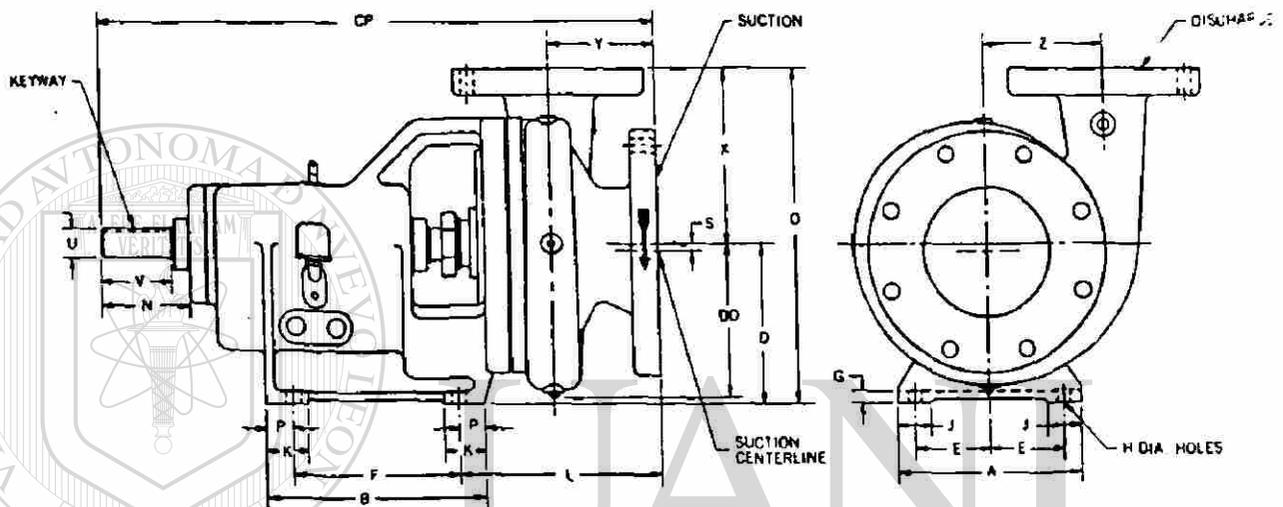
OVERHUNG IMPELLER, SEPARATELY COUPLED, SINGLE STAGE, FRAME MOUNTED
